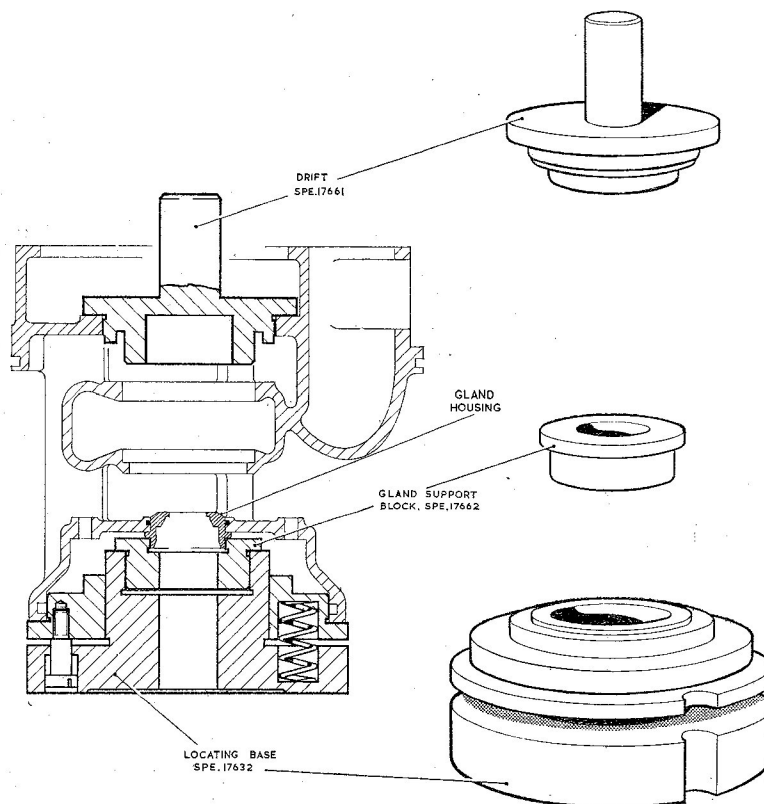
Tools for assembling the lower gland housing to the pump casing
